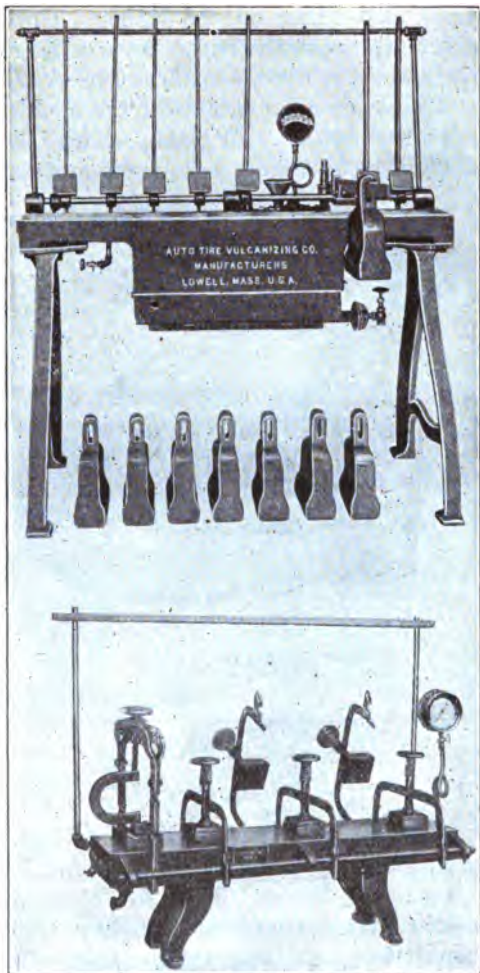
Tube vulcanizers. Upper unit uses weights for pressure, lower uses springs.
